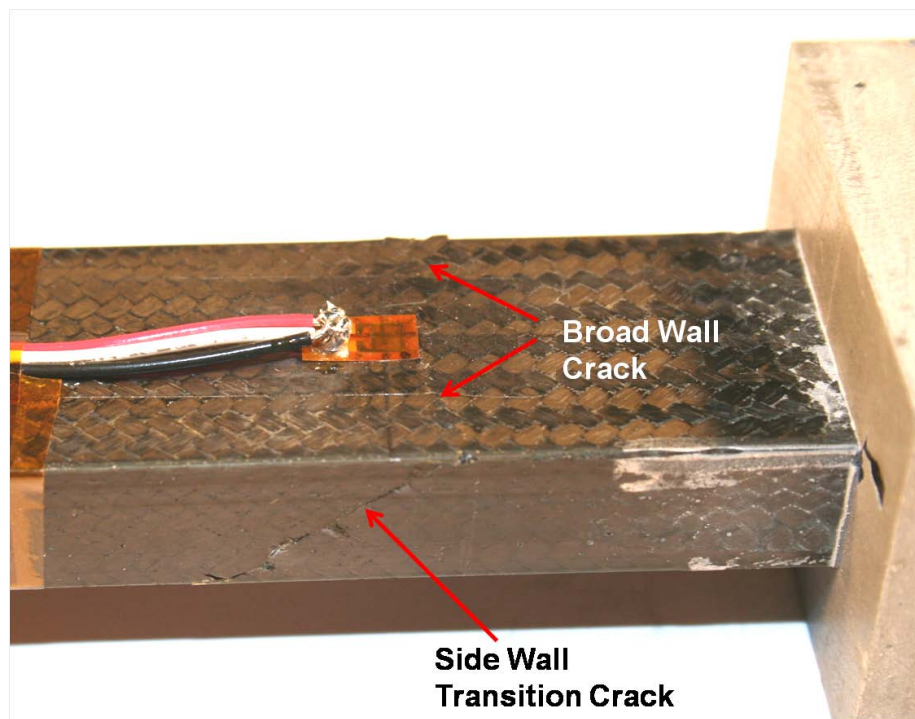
Shear Plane Side Wall Failure and Transverse Broad Wall Failure Cracks on Specimen Three
